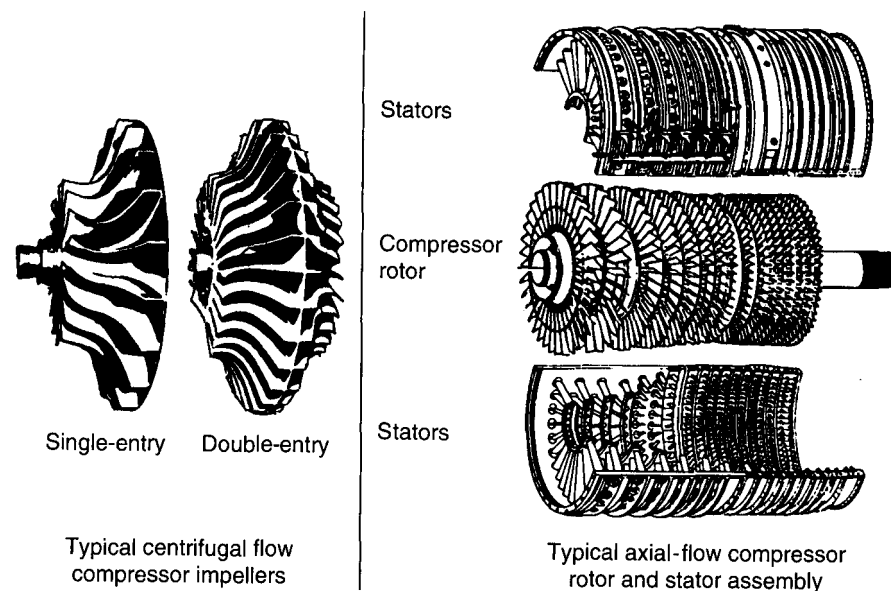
Types of compressors. Courtesy General Electric Company.
